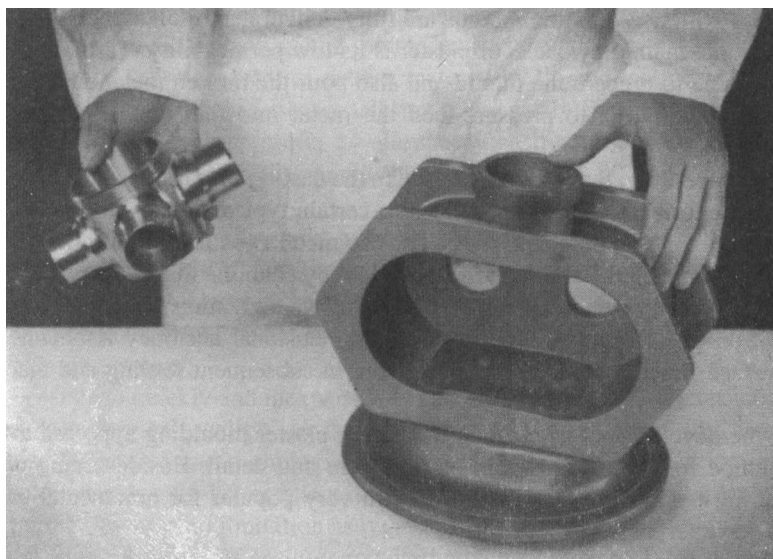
Typical precision stainless-steel casting made by the ceramic moulding process
